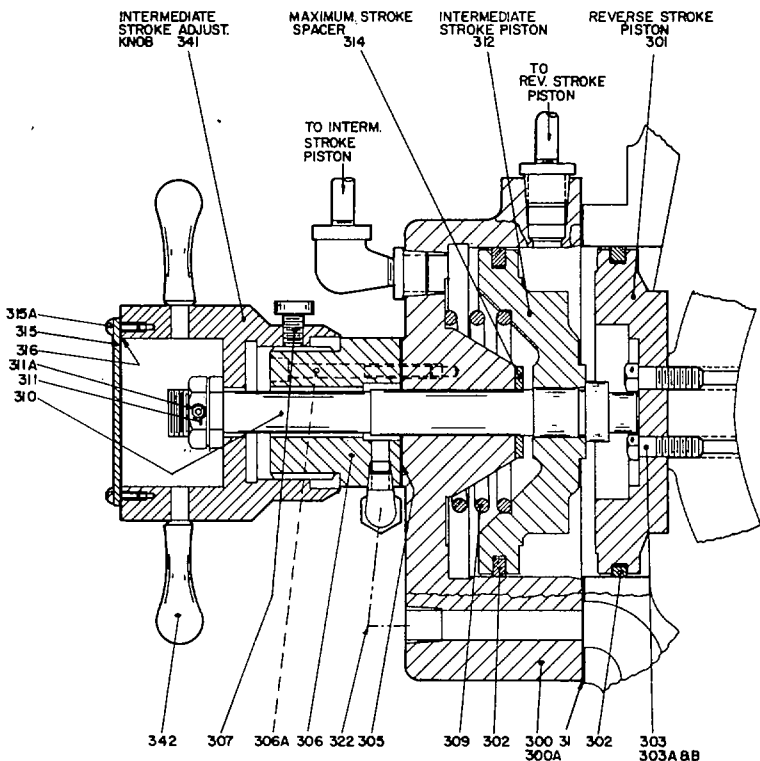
Parts drawing, Oilgear Type "R-Y" Control. DS-947602 (508998).
